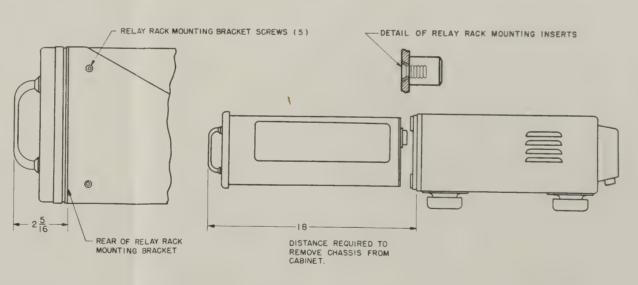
Relay-Rack Mounting Bracket, Outline Drawing
